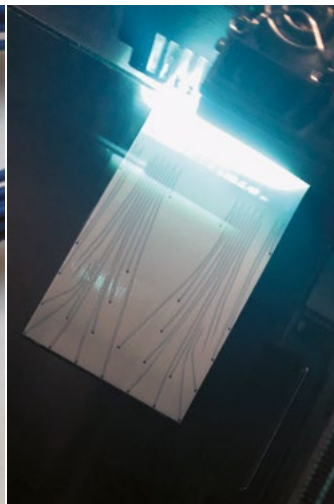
PolyJet 3D-printing of instrumented solar modules with embedded pressure tubes.
